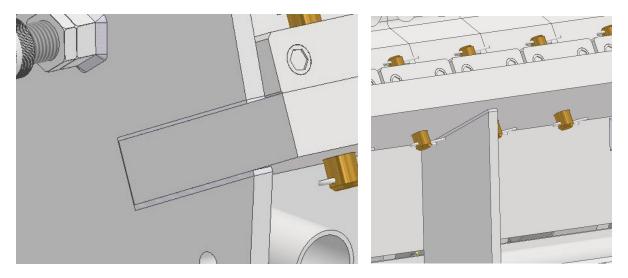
Welded Anvil Holder Flange, Secured to Anvil Rack with Proper Hardware
